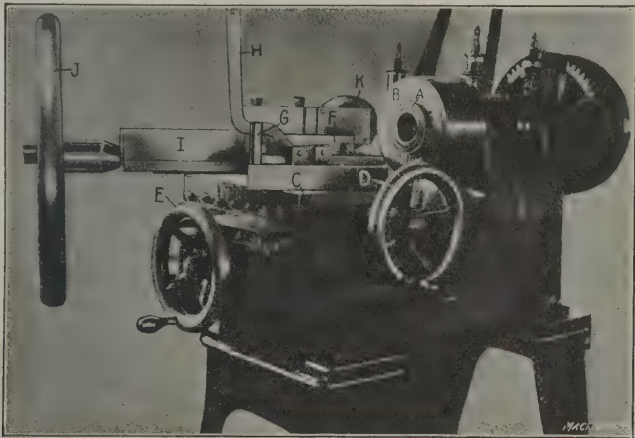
Spinning the Edge of the Shell over the Assembled Bearing
